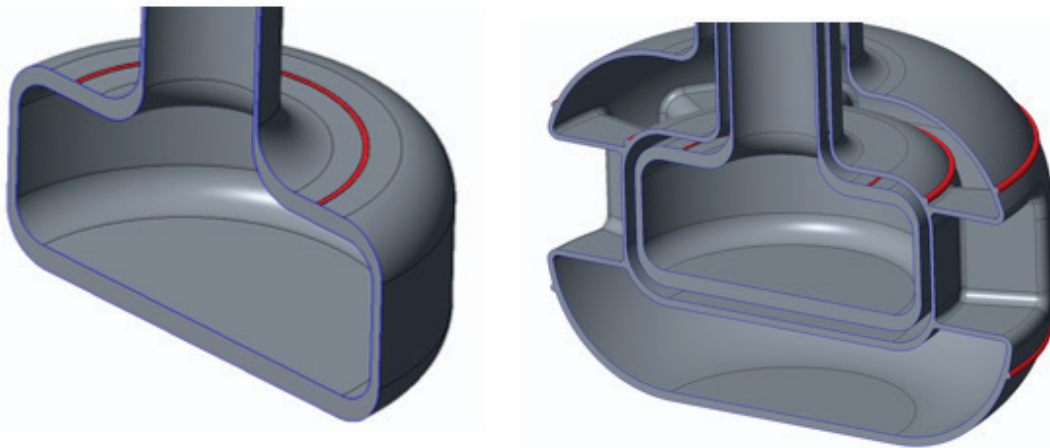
Manufacturing assembly of the STS cylindrical moderator.
